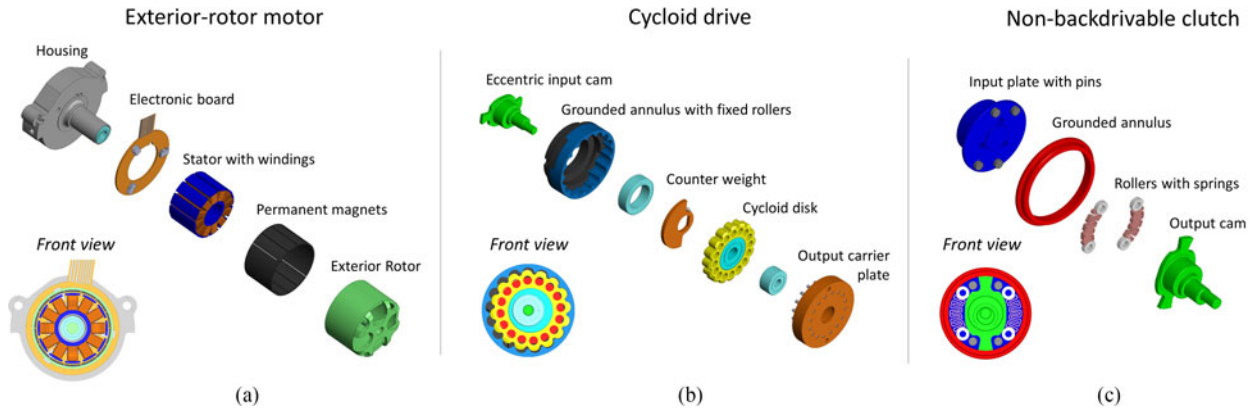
Exploded and frontal views of the custom (a) exterior-rotor motor, (b) cycloid transmission, and (c) nonbackdrivable clutch as implemented on the wrist flexor joint.
